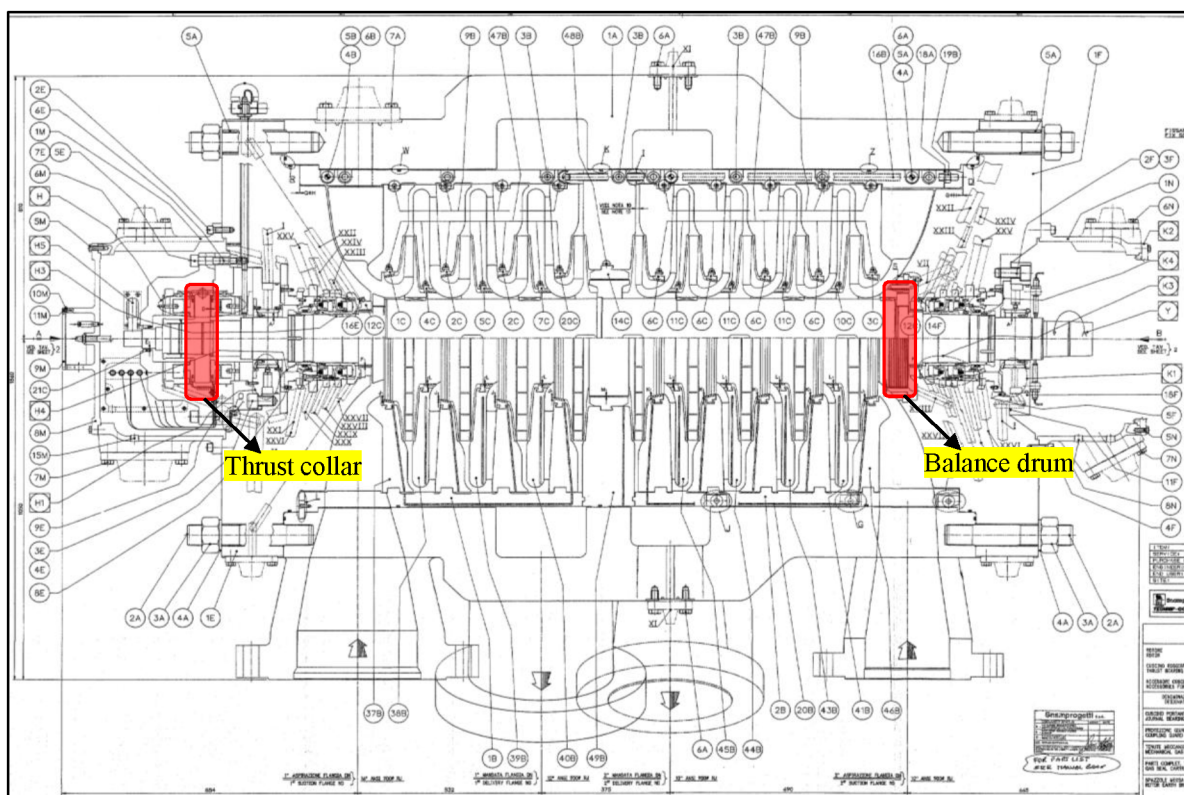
LP Compressor Cross section drawing showing thrust collar and Balance drum locations. The thrust collar is located at the NDE bearing of the compressor and the balance drum is located at DE bearing of the compressor.
